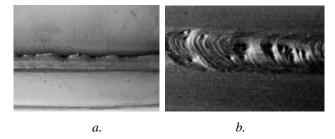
Welding defects. a. Lack of fusion; b. pores.
